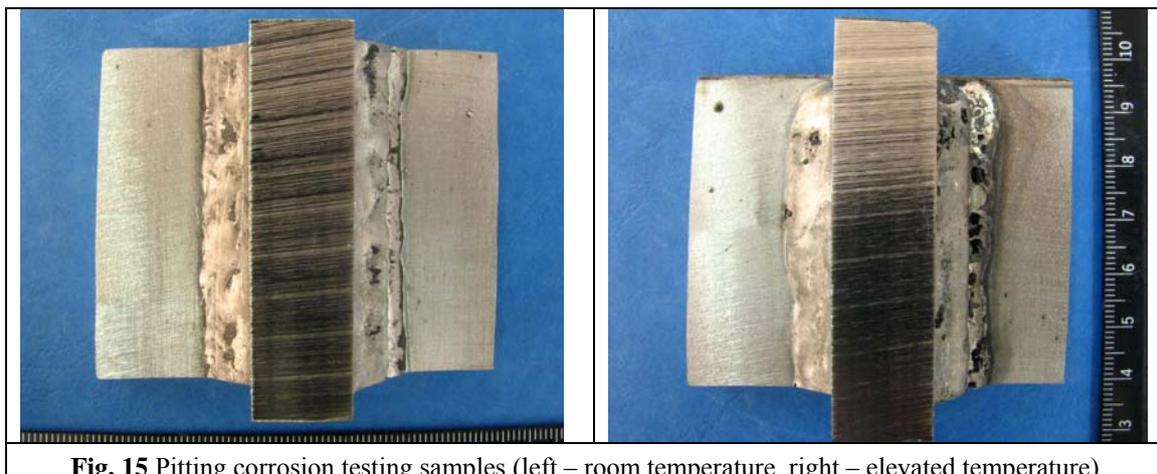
Pitting corrosion testing samples (left – room temperature, right – elevated temperature)
